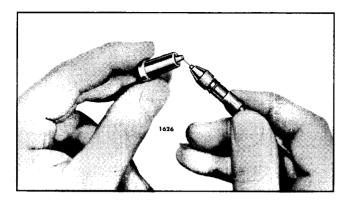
Cleaning Spray Tip Orifices using Tool J 4298-1
